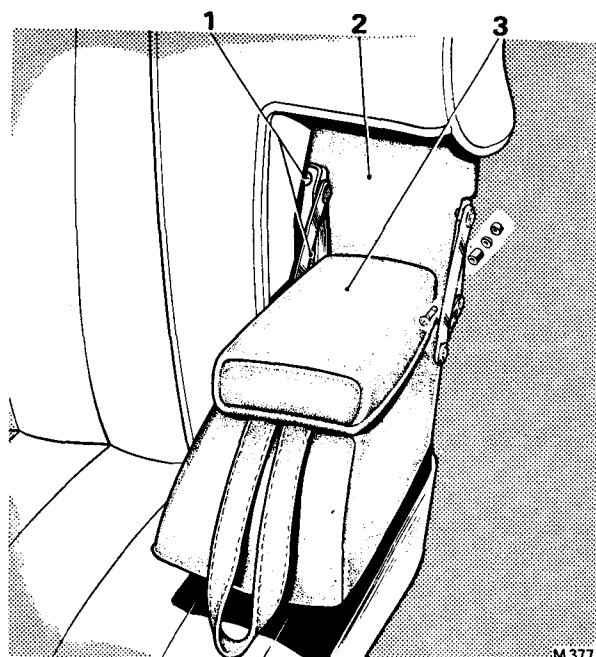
FRONT SEAT ARMREST (4-Door Saloon and Long Wheelbase Cars after Car Serial Number 6000)
